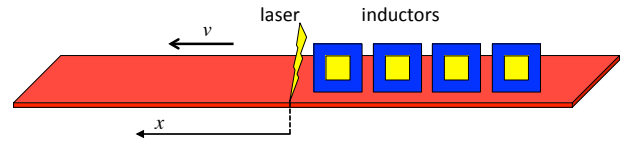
Sketch of the induction heating applied after the welding.
